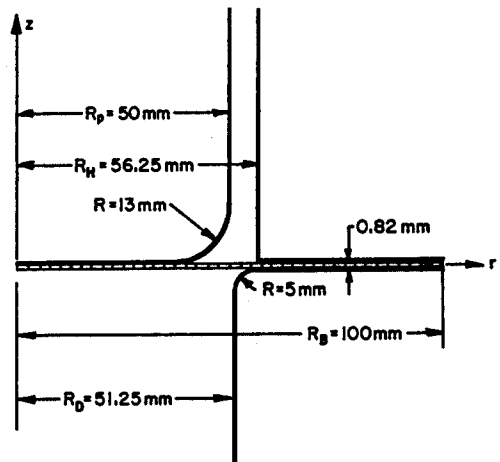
Tool geometry and mesh discretization of sheet material for cup drawing simulation
